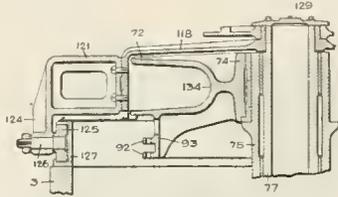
Cross Sectional View of the Cable Guiding Device taken through Line Y-Y in Fig. 21
